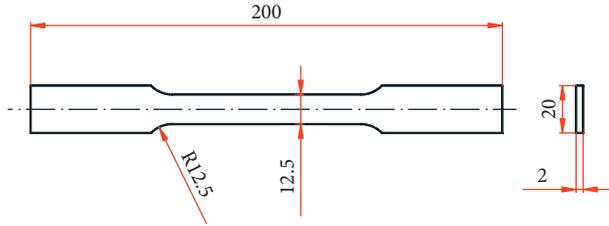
Geometric configurations of the tensile test specimen (unit: mm).
